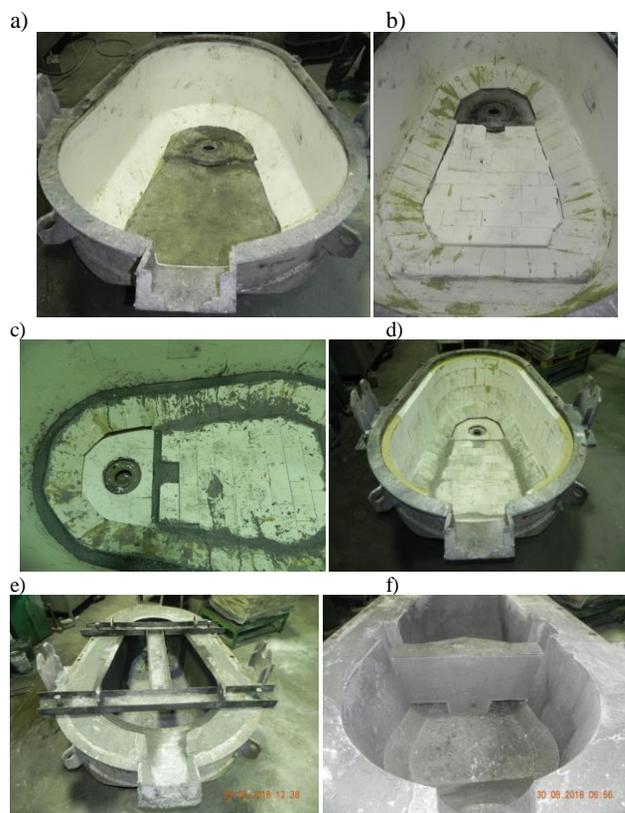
The stages of pouring furnace lining installation: a) applying insulation, b) lining installation on the ladle bottom, c) filling the gaps using Triad compound, d) lining installation on the whole ladle surface, e) pouring the ladle walls with Triad liquid compound, f) ready to use ladle after removing formers [4]
